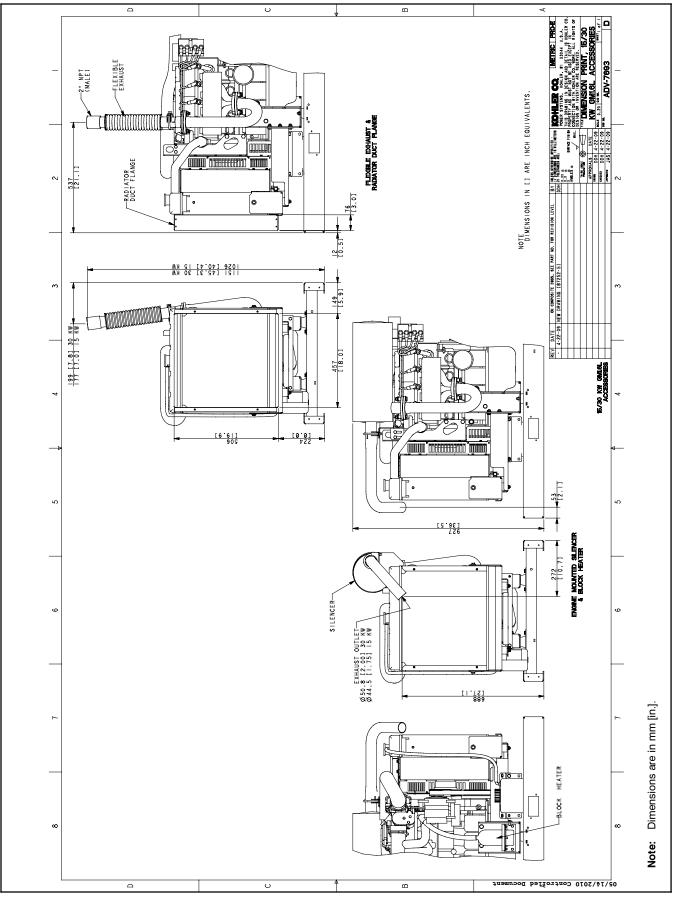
Dimension Drawing, ADV-7693, Accessories
